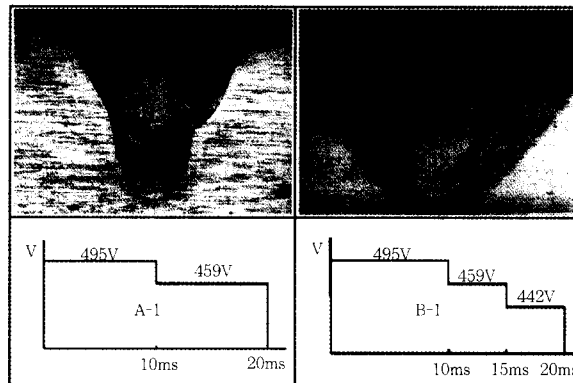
Cross-sections of laser spot welds with pulse shape in A7N01 alloy
